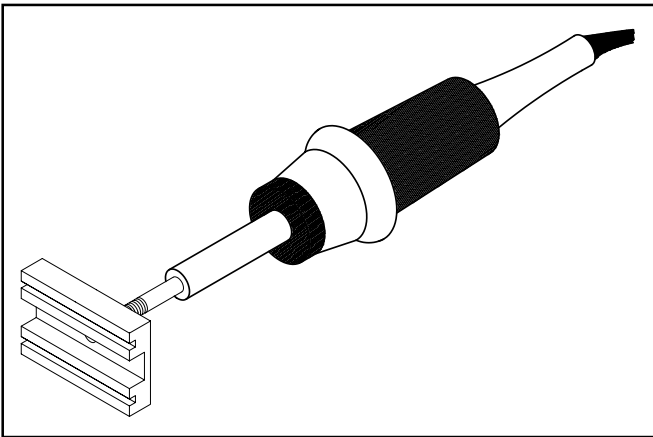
A soldering iron equipped with a special tip can heat all of the IC pins at once, but can't remove solder or straighten pins. (This tip is no longer made.)
